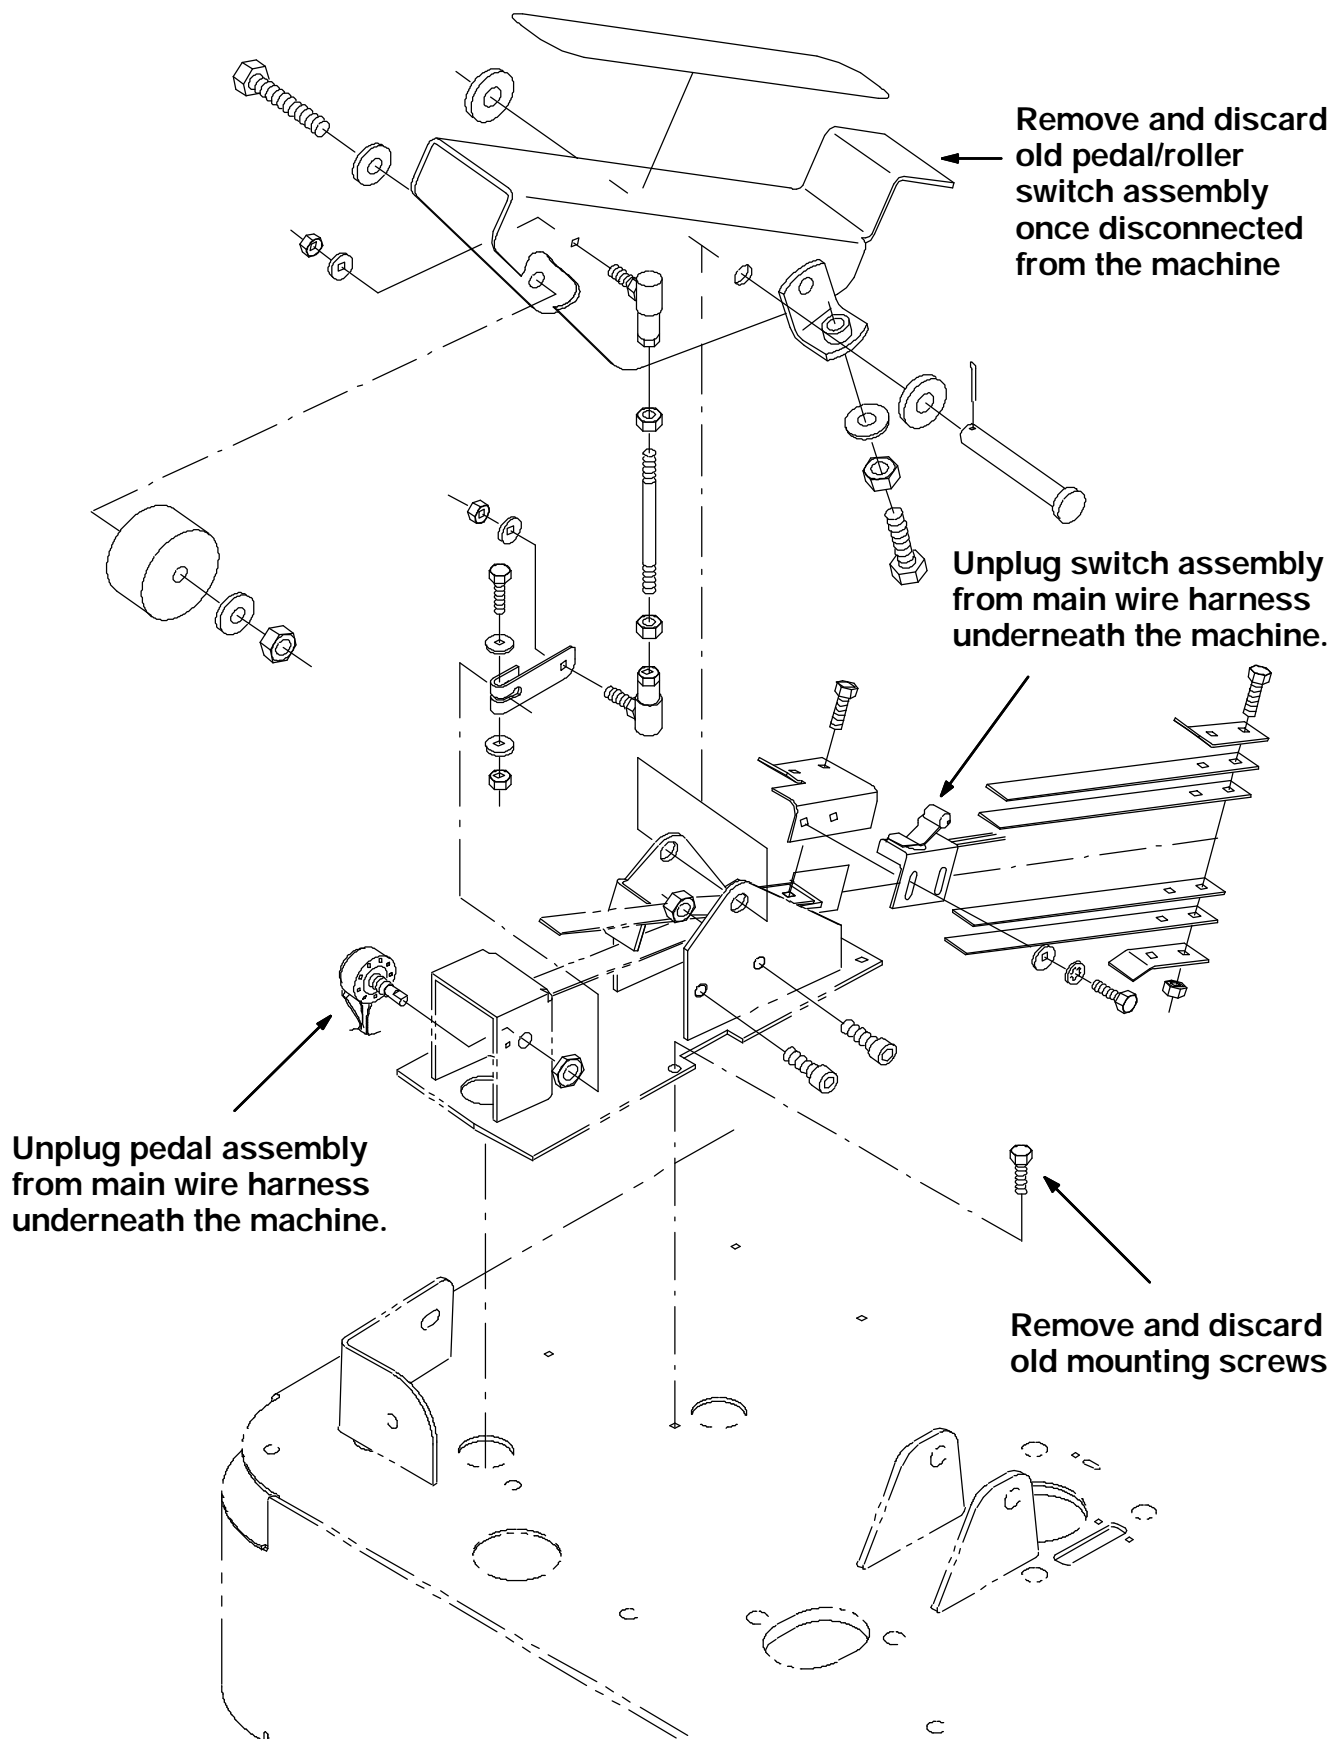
PEDAL/SWITCH ASSEMBLY REMOVAL
